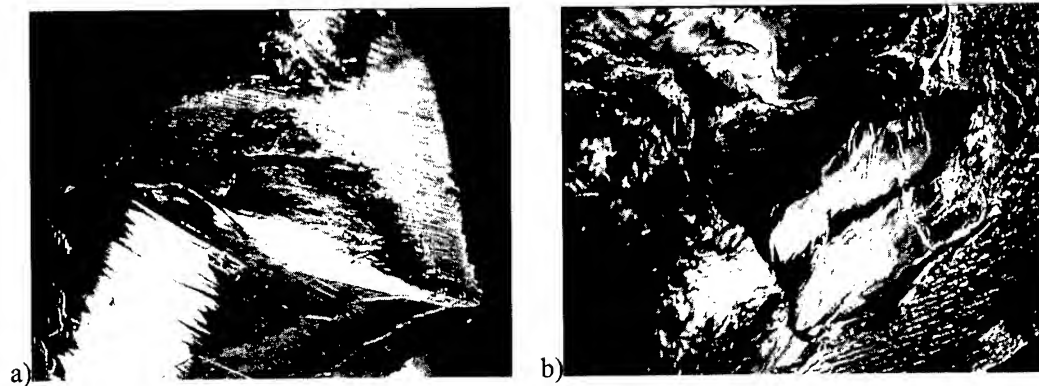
Typical adhesion of Mg alloy on twist drills during machining 60 mm deep holes with a feed speed of 0.5 mm/rev: a) on the clearance face of a ZrN-b twist drill, after 160 holes (9.6 m); b) on the surface of the flutes of an uncoated twist drill after 200 holes (12 m).
